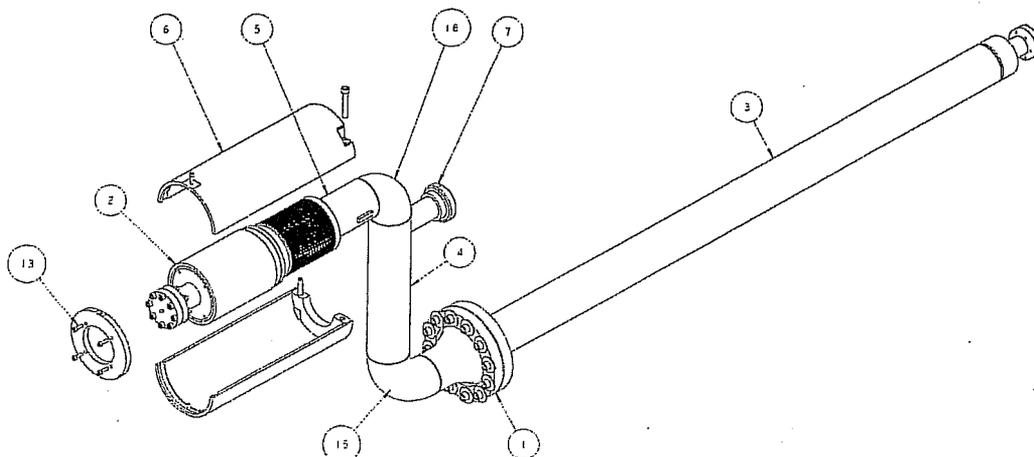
Isometric View of MQX1. 1 - Housing with Lambda Plug; 2 - Test Cap (this is removed for tunnel installation); 3 - Conductor Protection Tube (this is removed for attachment to DFBX); 4 - Vertical Pipe Section; 5 - Horizontal Section (this connects to magnet); 6 & 13 - Bellows Restraint (this is removed for tunnel installation); 7 - Helicoflex Sealing System; 15 - Long Radius 3 IPS Weld Elbow; 16 - Short Radius 3 IPS Weld Elbow.
